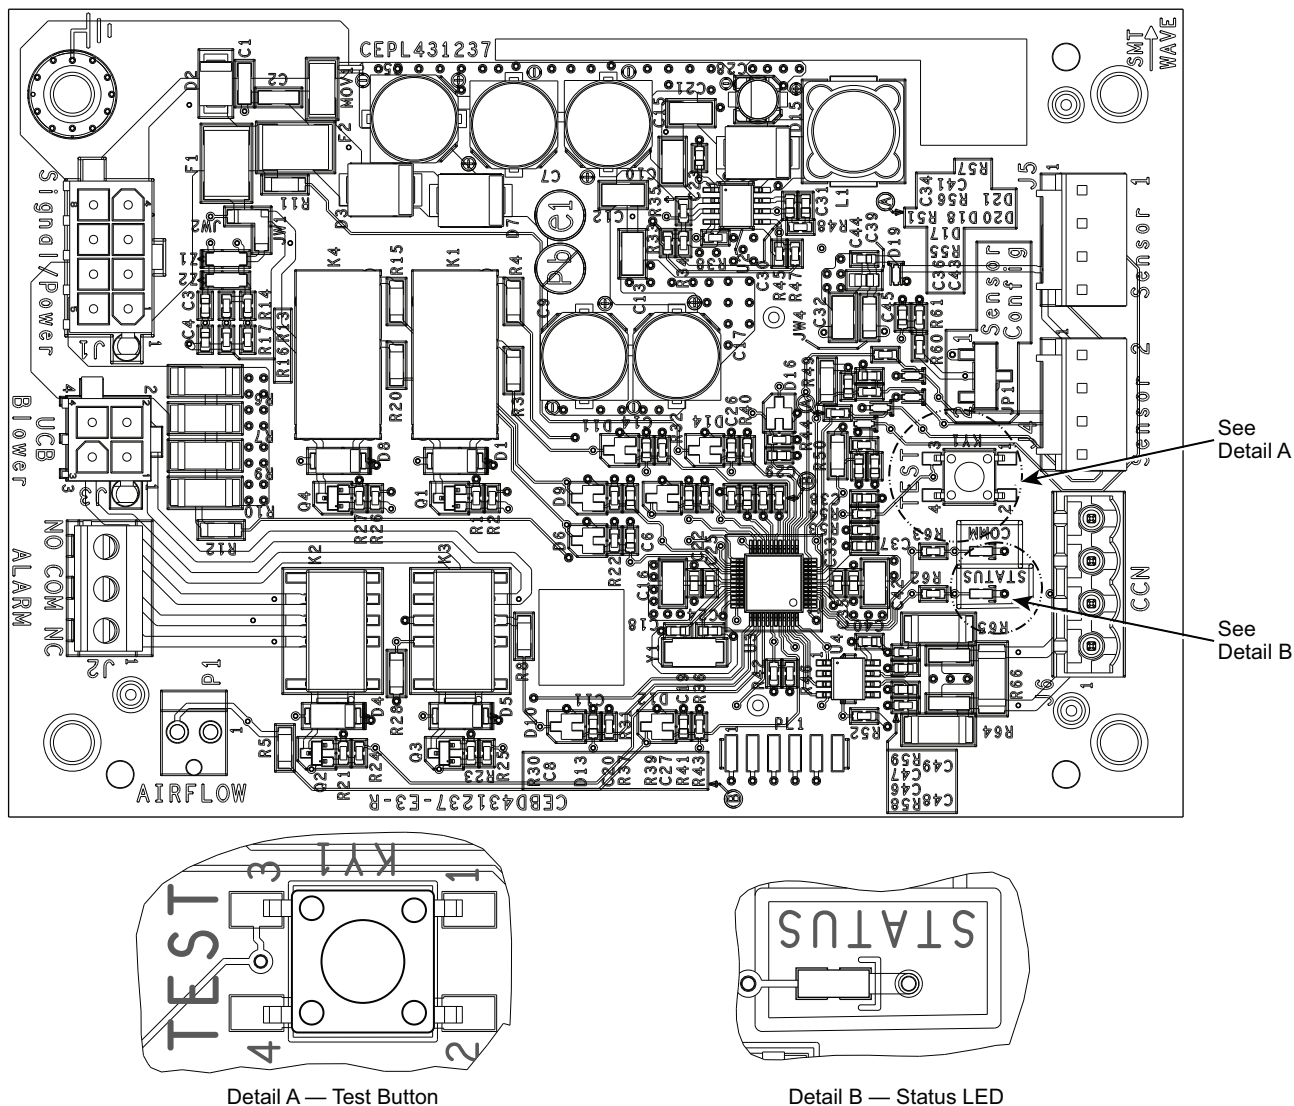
Dissipation Control Board — Shown without Dust Cover
